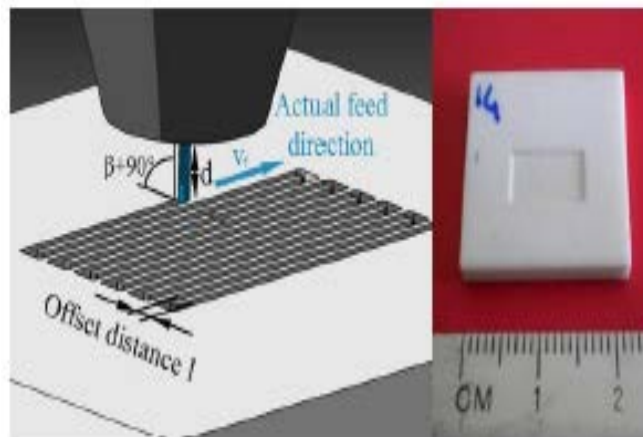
Implementation of machining strategy (left) and machined work-piece (right)
